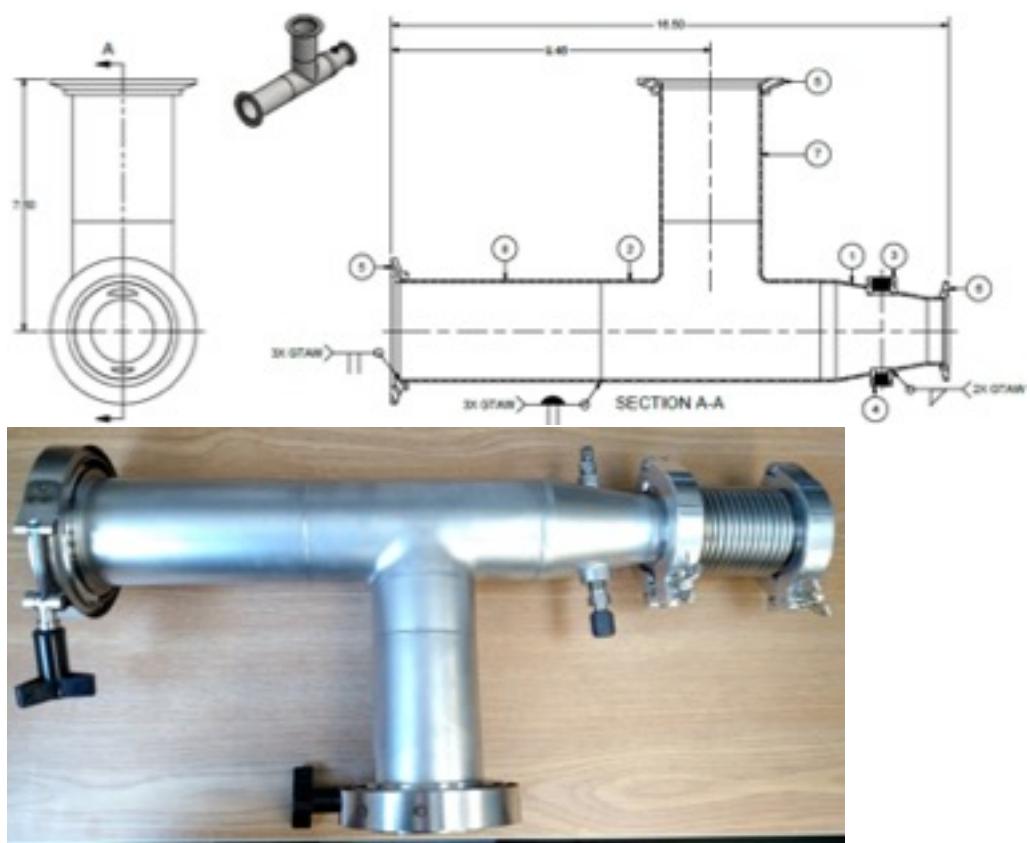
Design drawing and photo of mechanical testing atmospheric chamber
